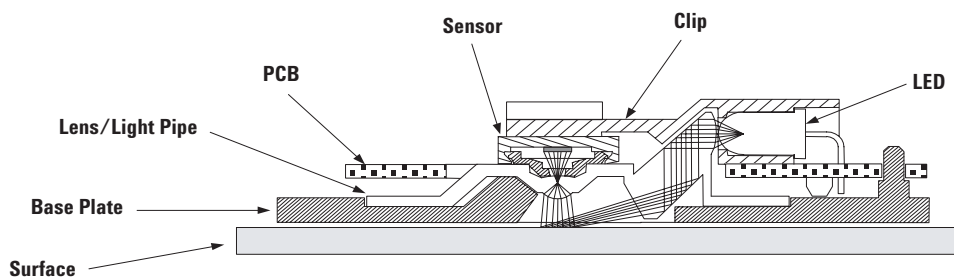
Sectional view of PCB assembly highlighting optical mouse components (optical mouse sensor, clip, lens, LED, PCB and base plate).
